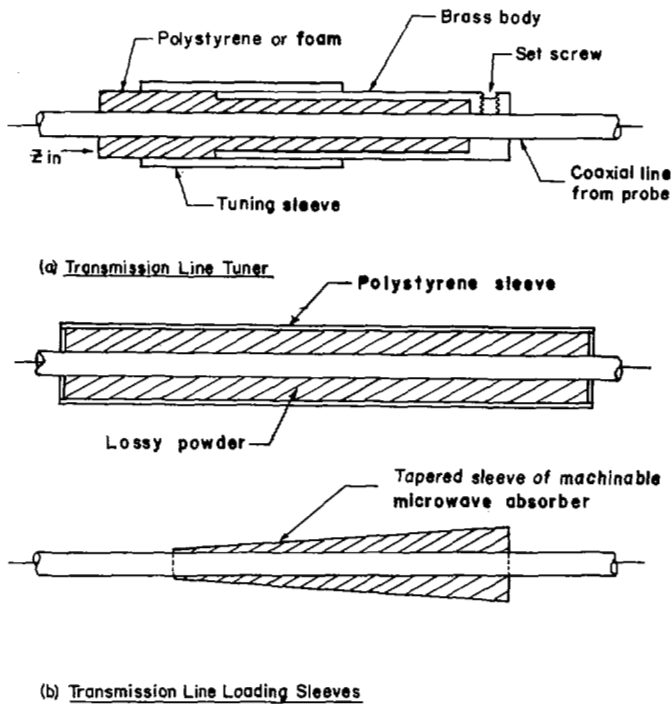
Chokes and loading sleeves to suppress current induced on exterior surface of coaxial line.
